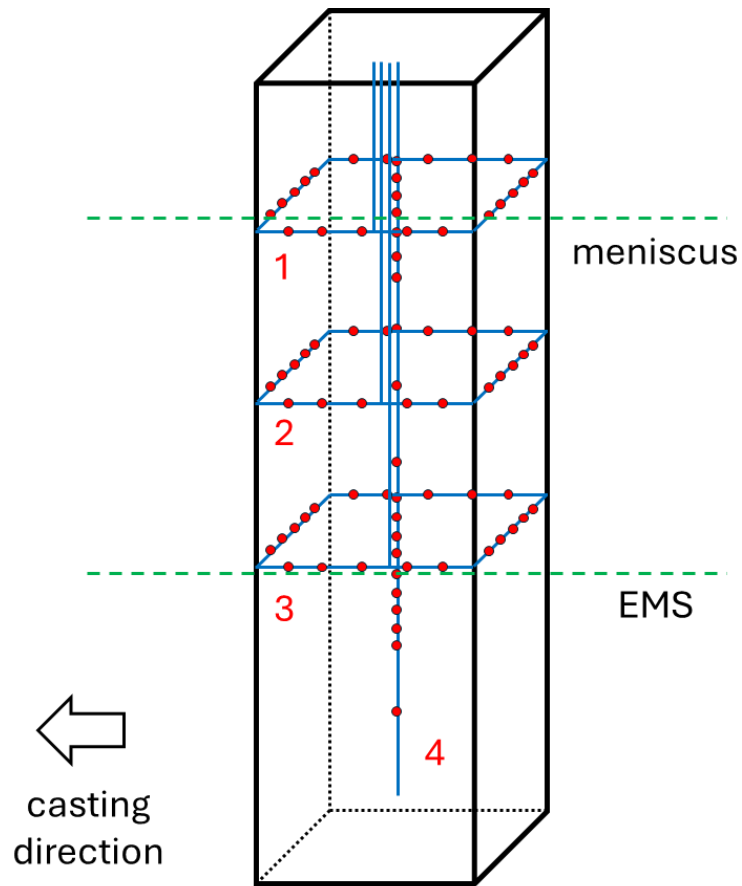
Fibre optical sensor alignment for GSW mould. 3D-view of fibre placement (blue lines) and sensor distribution (red dots) in reference to the casting direction during bending.
